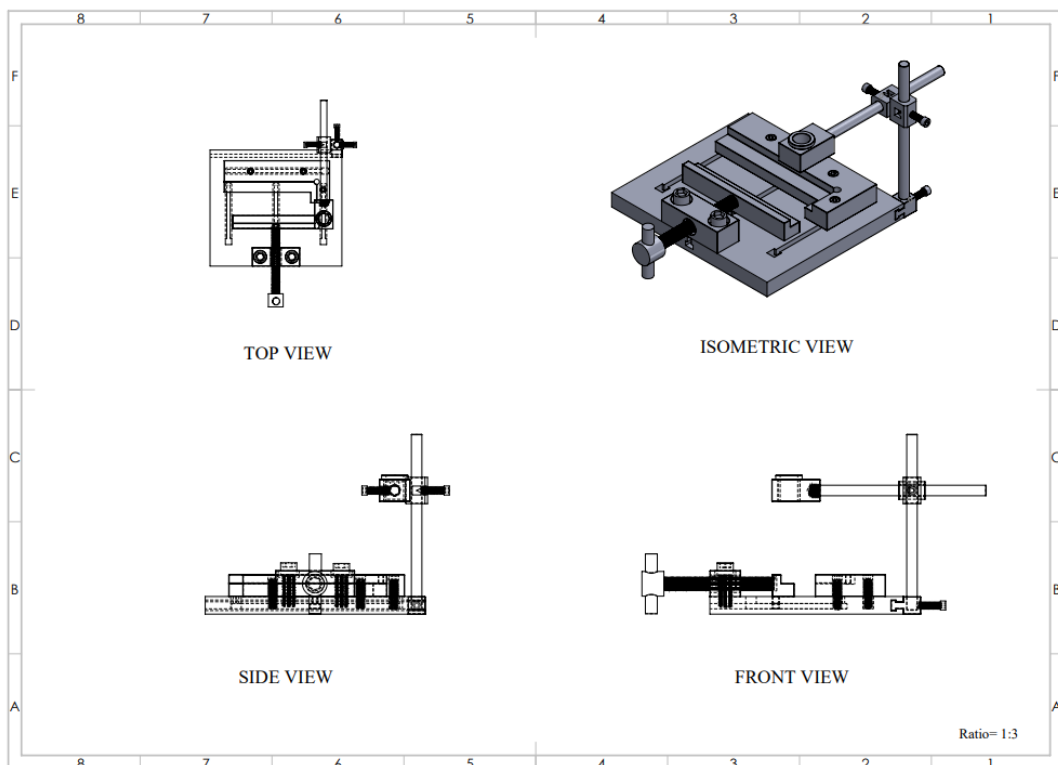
Orthographic view engineering drawing of 3-axis Jig.
